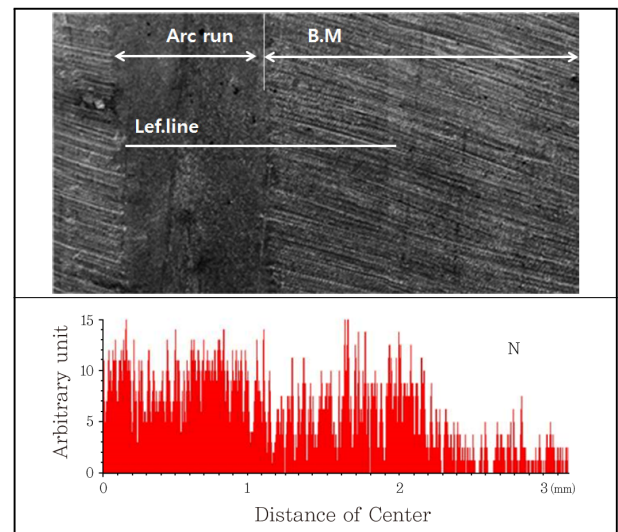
EDX analysis of bead surface(Melt run welding with 98%Ar+2%N₂, Arc length 9mm)
